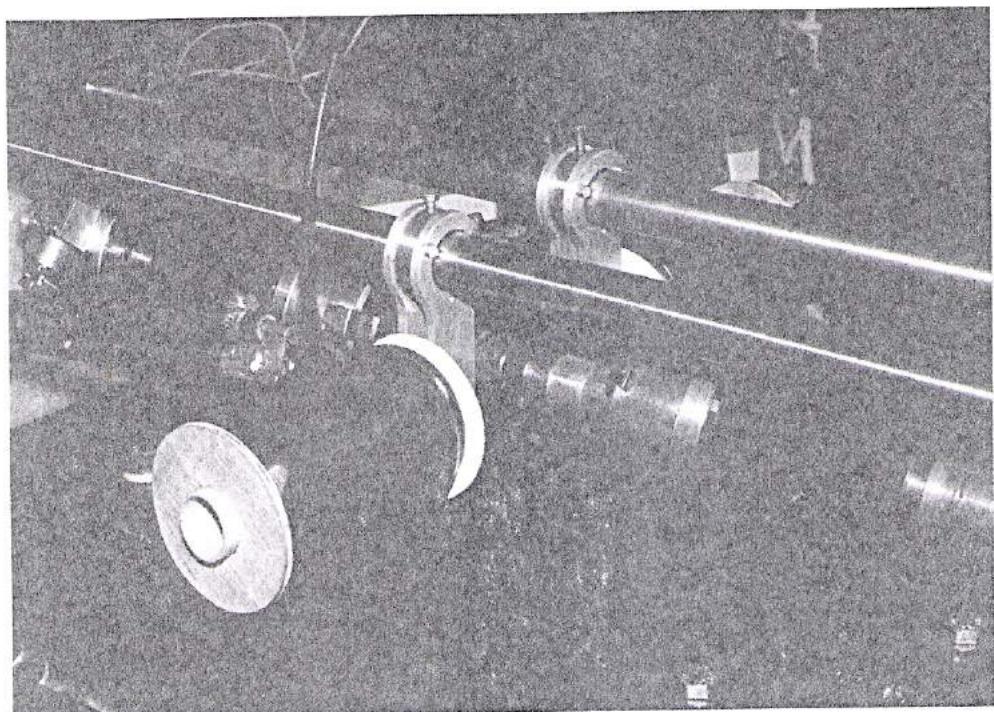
Clamps, copper electrodes and magnetic coils of the flash welder
